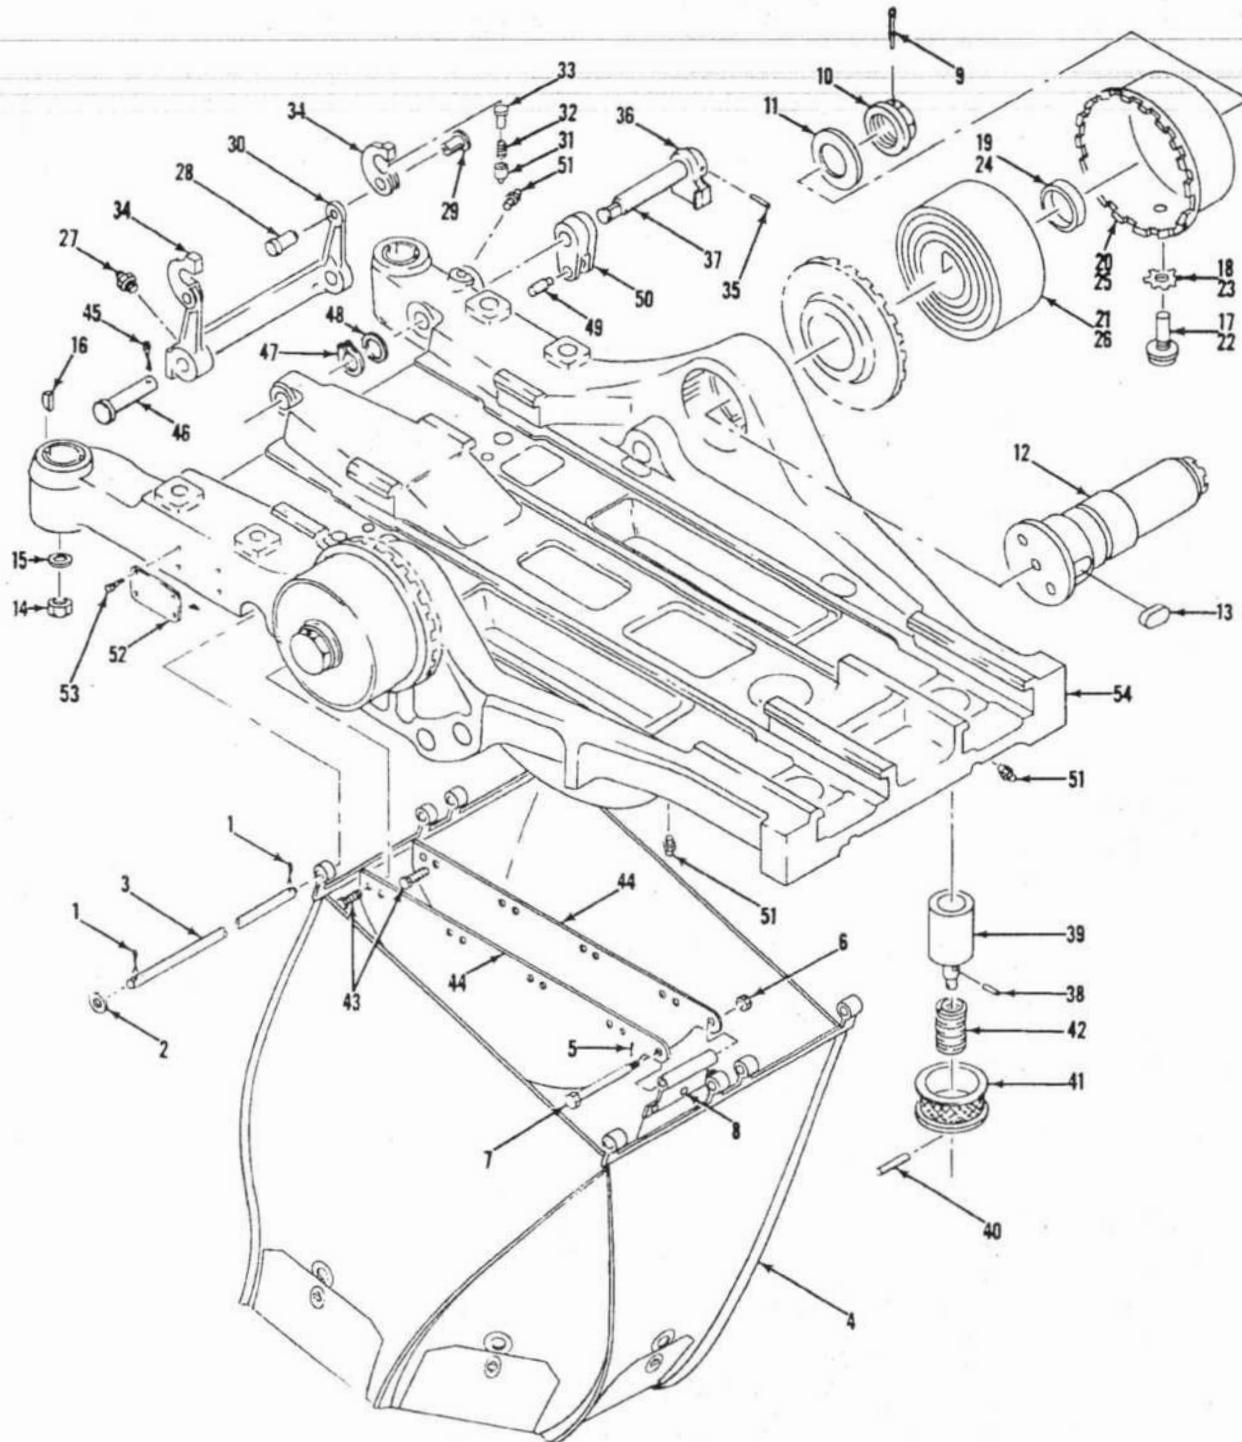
20 MM Cradle (MK 14 MOD 0)
